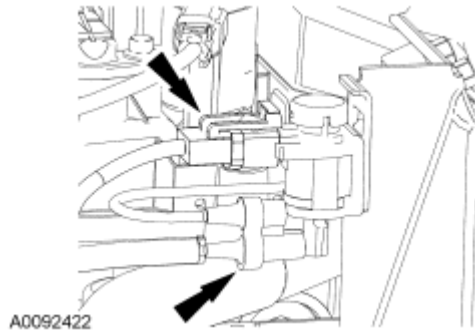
Locating Secondary Air Injection Vacuum Regulator Electrical Connector And Vacuum Hose
